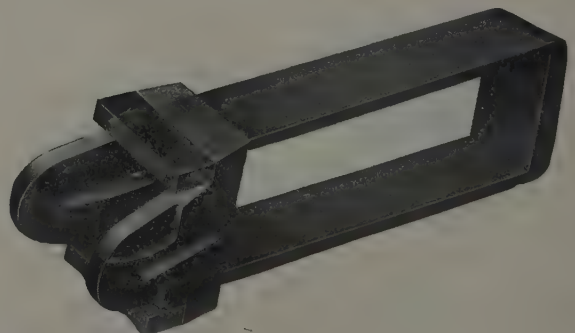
A—Combination Yoke with T Head for Friction Draft Gear. W. H. Miner.
